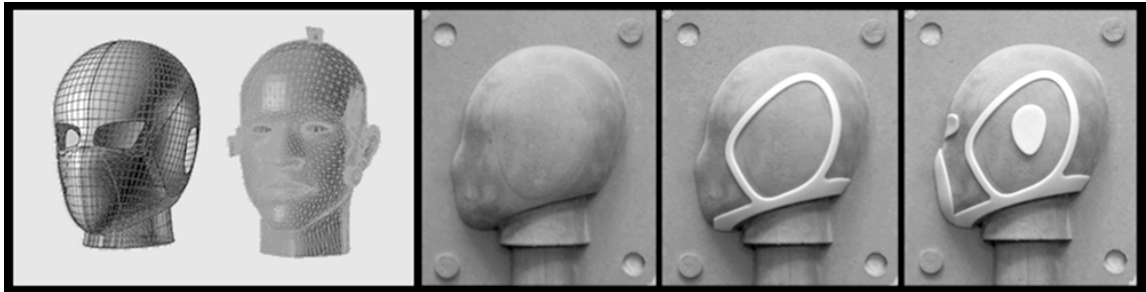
The design of the mask-helmet and the head (including pins for the broken elements) in Rhino CAD software (left). Three steps of making the mold (right), from the milled MDF form, to the final mold using 3D printed details from ABS plastic and using a FDM Dimension machine.
